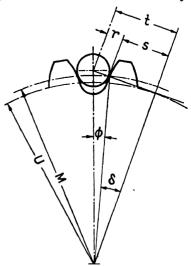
DIMENSIONS OF ROLLER IN CLEMENT COMPARATOR
